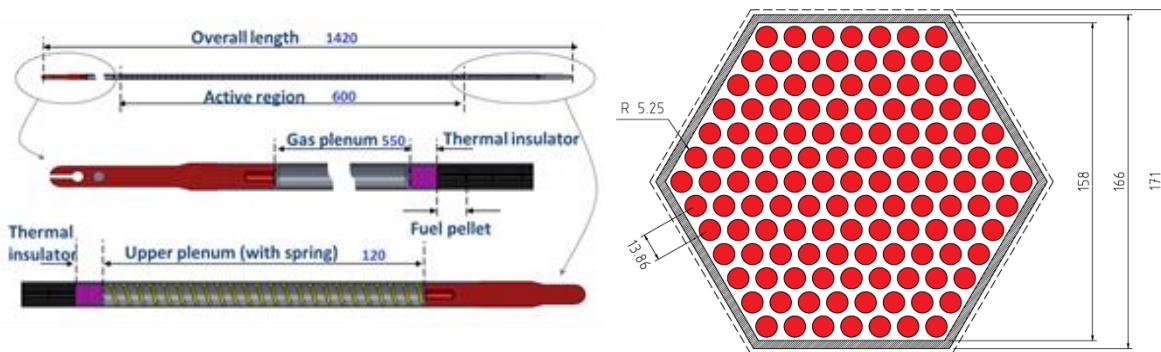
Final ALFRED fuel pin (left) and FA cross-section (right). Dimensions in mm.
